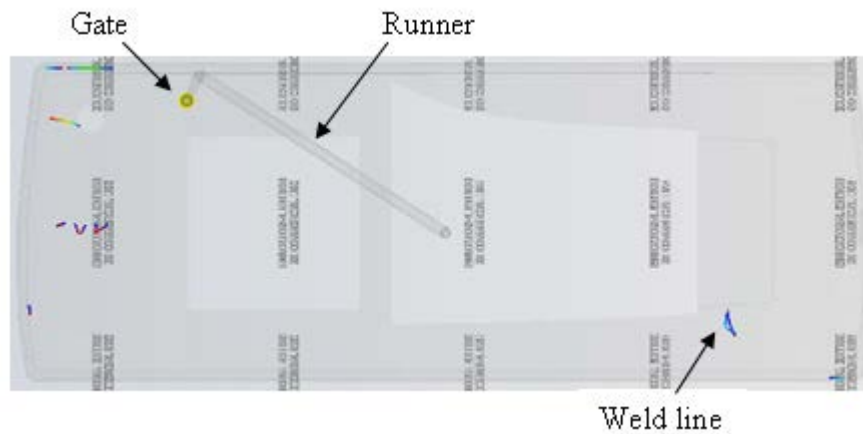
Weld lines produced by runner diameter of 2.042mm
